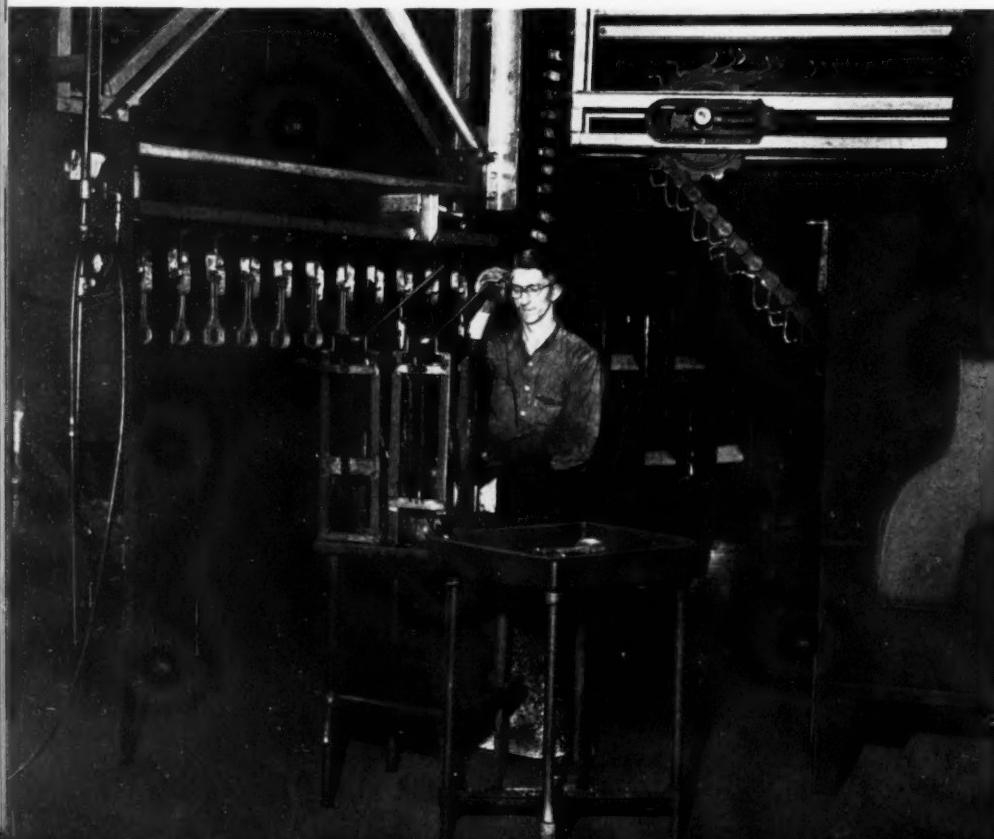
Machine for Core-drilling the Oblong Crankpin Bearing in the Rough Connecting-rod Forgings, as well as for Drilling and Reaming the Wrist-pin End
